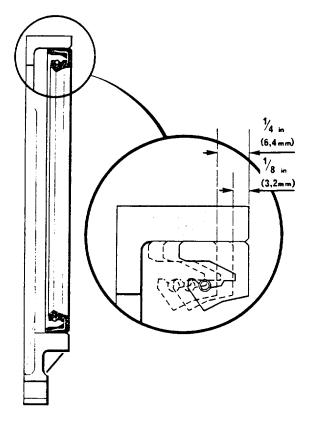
Three Positions for Lip Type Rear Main Oil Seal.
